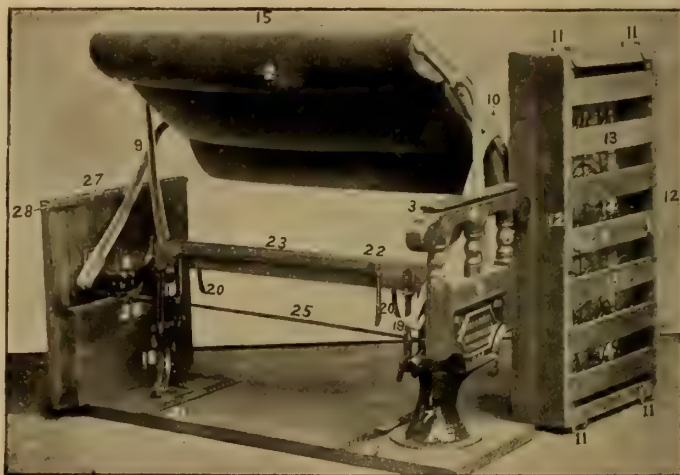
EXTRA HIGH BACK SEAT. CUSHION REMOVED AND SEAT TILTED TO SHOW MECHANICAL CONSTRUCTION.
